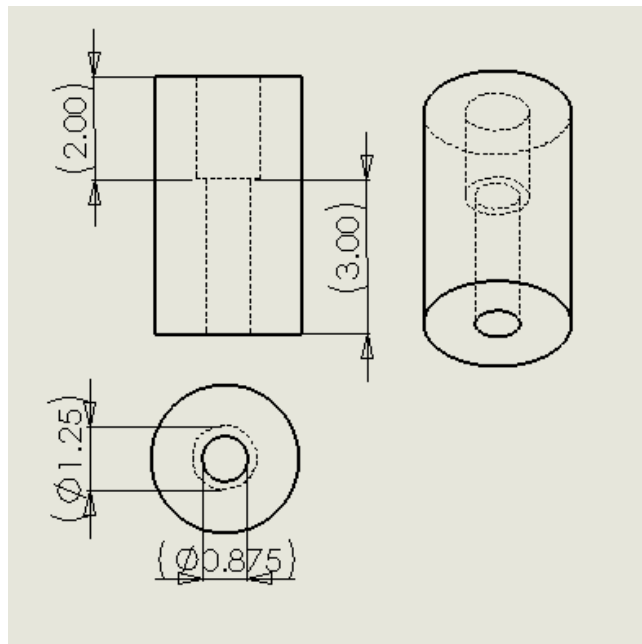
Schematic Drawing of the Certain Hole on the Die
